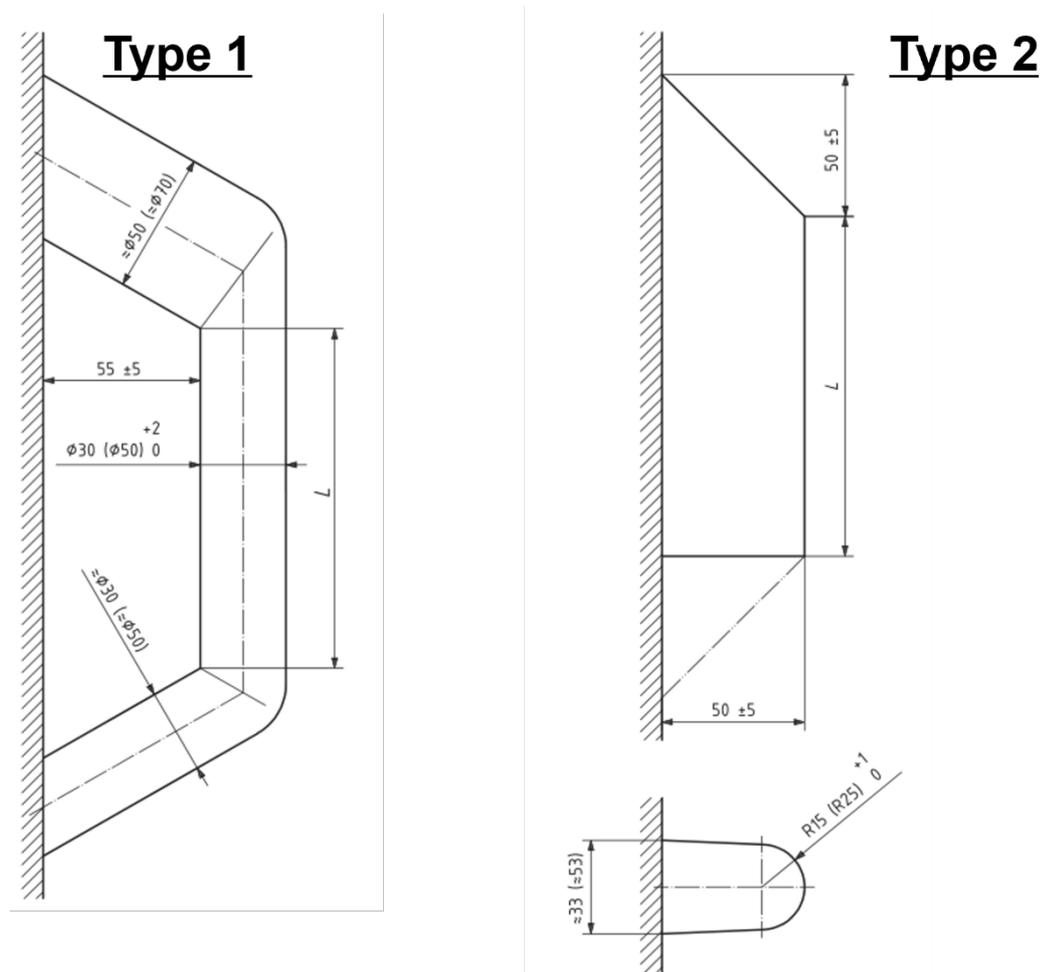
Cast-on test block -Type 1 and Type 2 (Dimensions in mm)
